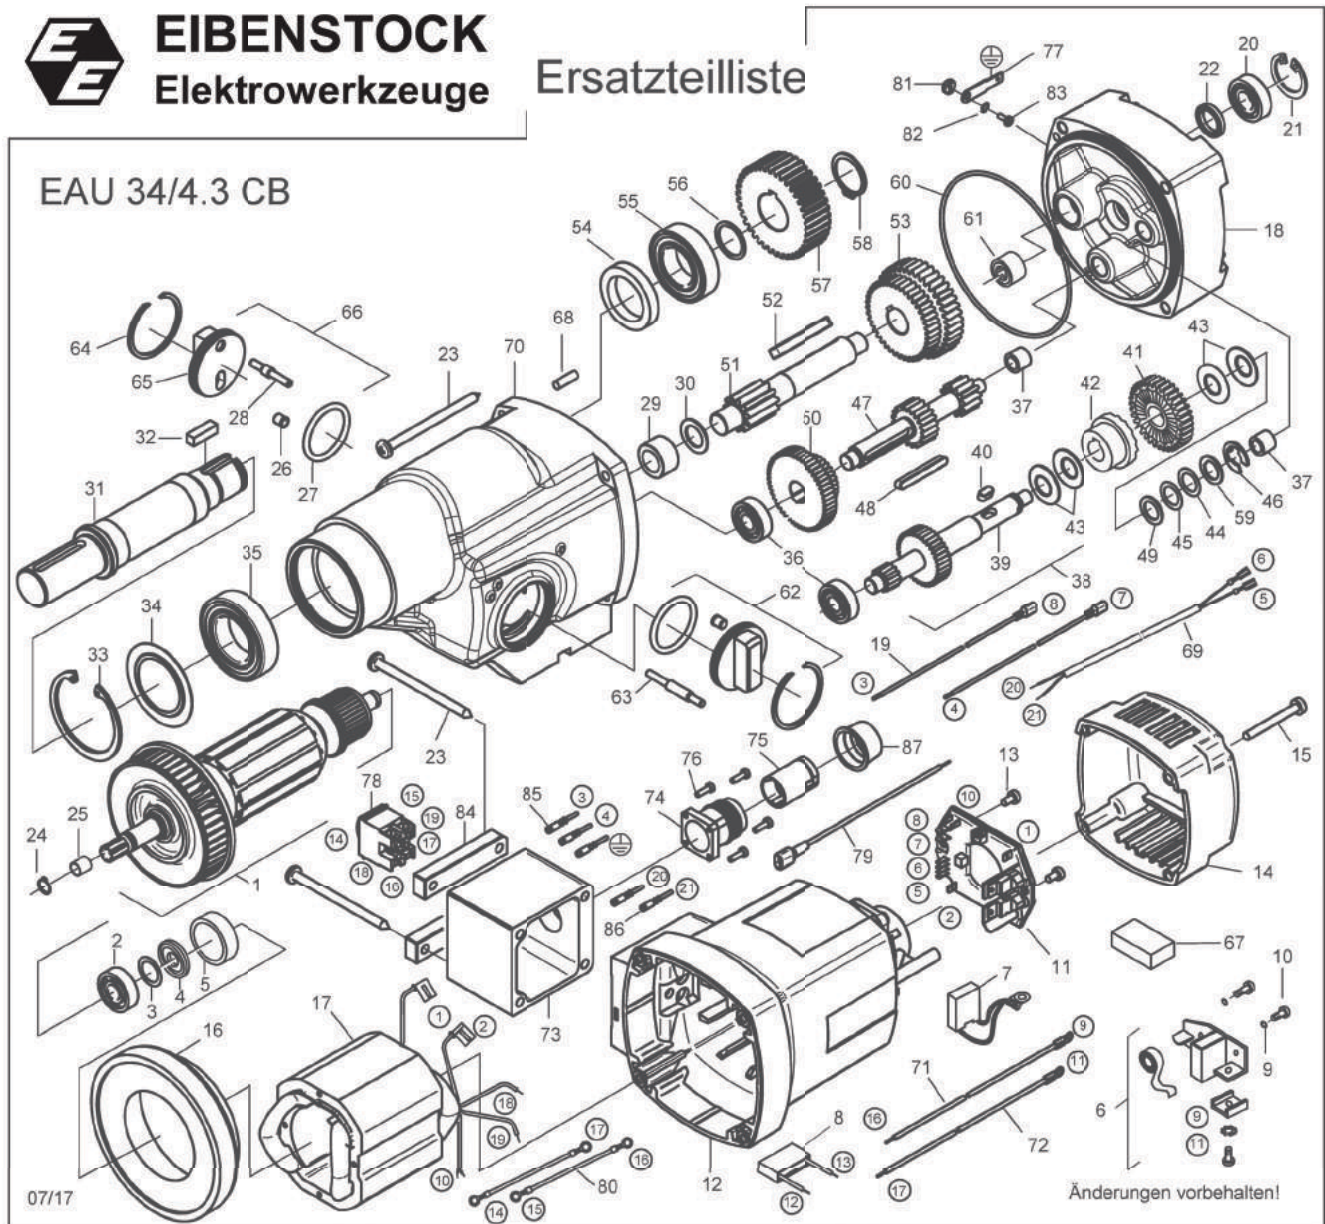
EIBENSTOCK MOTOR ASSEMBLY -- GEN. 2 ONLY
